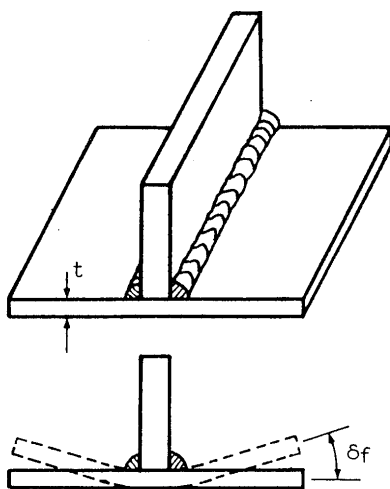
Angular distortion due to fillet weld of T-joint.
